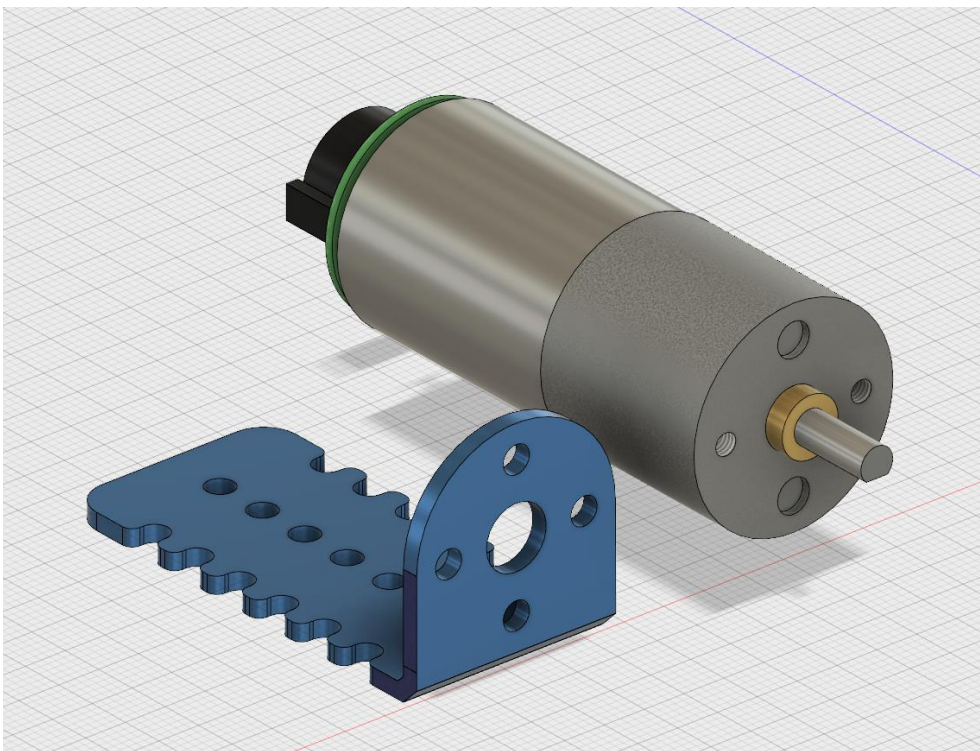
Pololu 25D mm Gearmotor Bracket and 75:1 Metal Gearmotor with 48 CPR Encoder -3D Sketch [22] [16]
